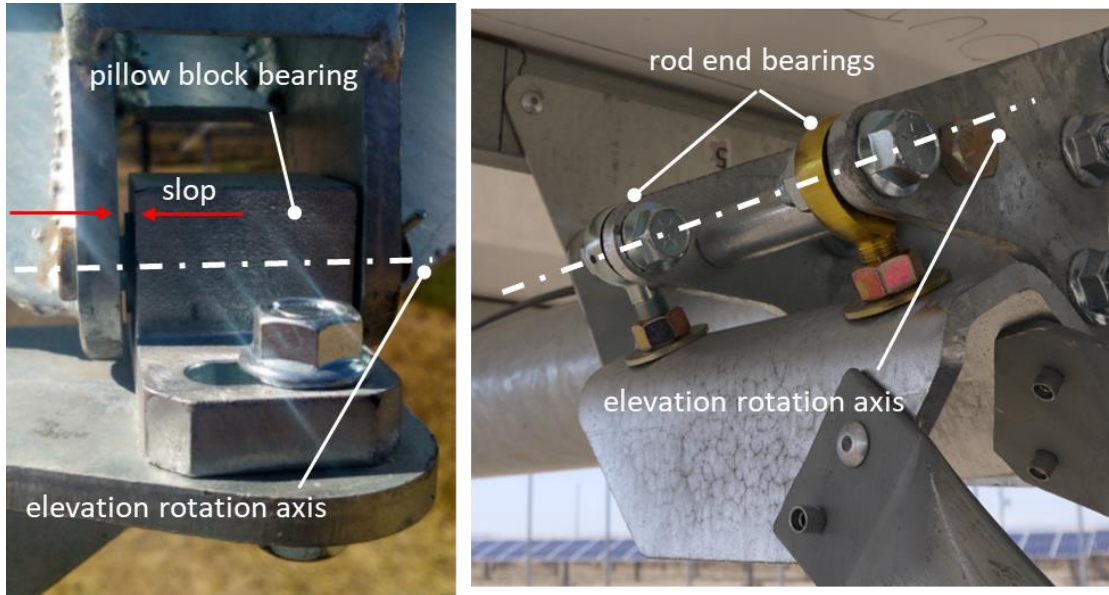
Elevation axis pivot bearings, 2<sup>nd</sup> SunRing prototype (left) and 3<sup>rd</sup> SunRing prototype (right)
